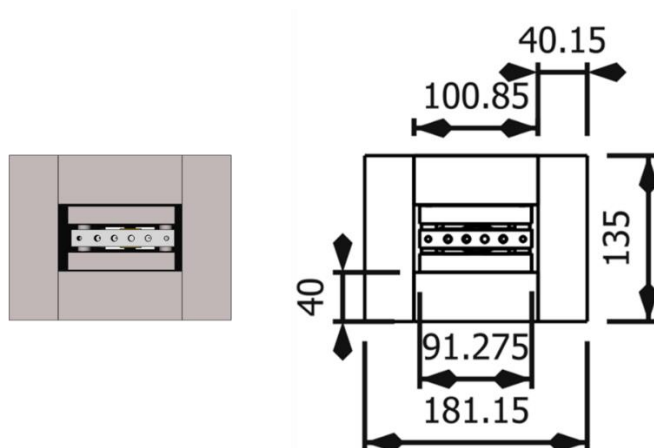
Lateral view of the schematic representation of the calorimetric assembly (reactor, heat flow sensors and heat sink). Dimensions in millimetres.
